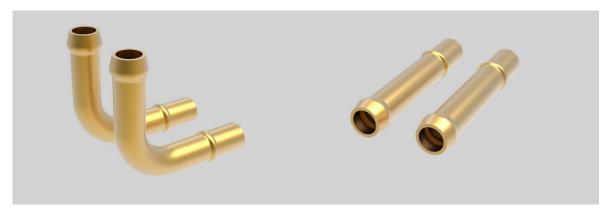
Motor Coolant Fittings for one motor (90° or 180°)
